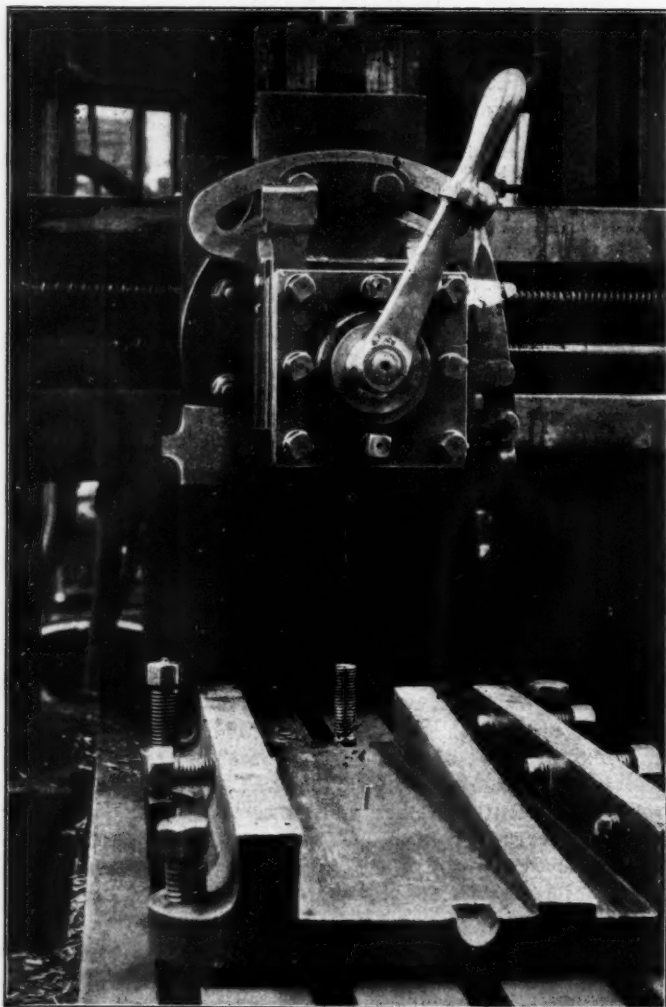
Shoe and Wedge Chuck on Small Planer.
